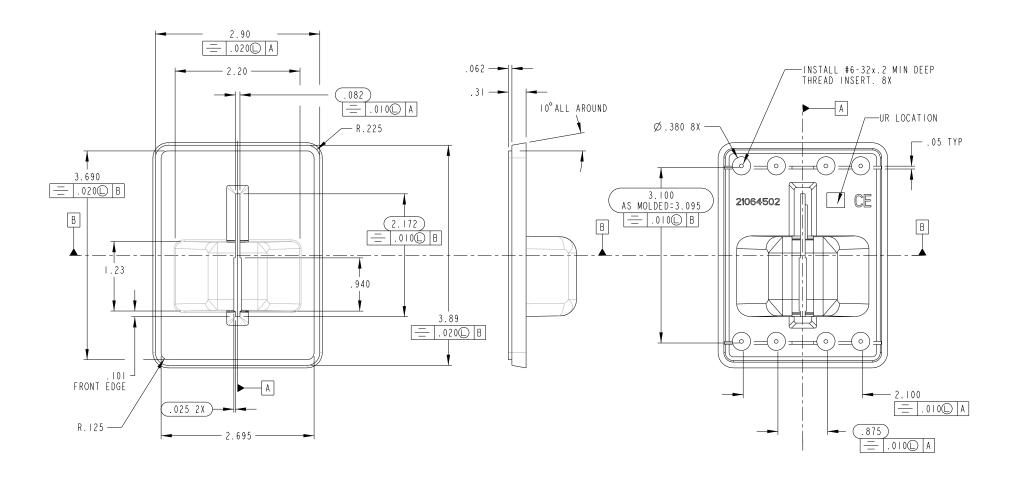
Dimensions for Flat-Faced Bezel Design, Sheet 1
